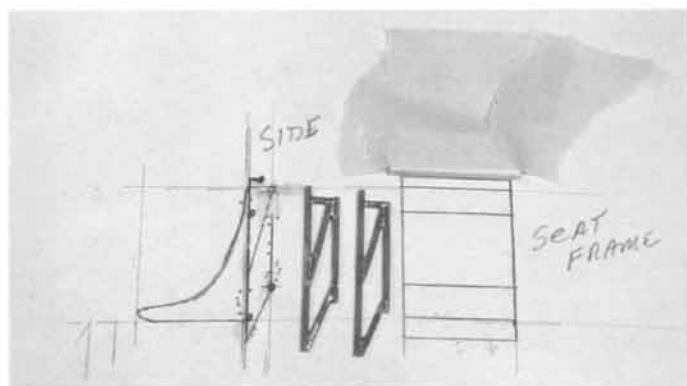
Next set the individual parts in place on top of the drawing, using pins to hold the parts in place. As you set the part apply a tiny amount of super glue to each joint, using a thin wire as an applicator. Gluing the joints as you build up the seat frame helps the pins hold everything in place.
